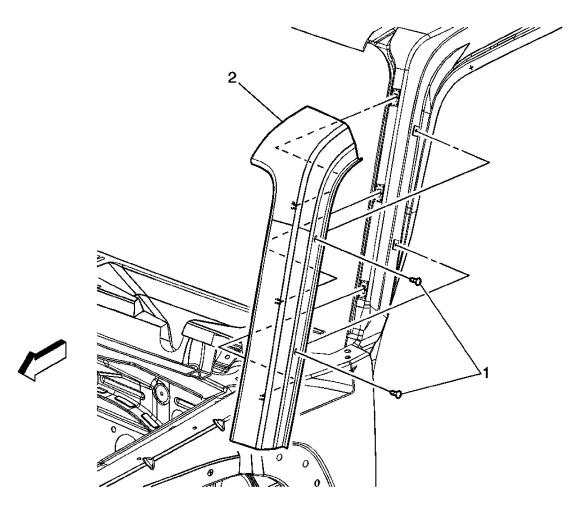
Windshield Pillar Reveal Molding Replacement Courtesy of GENERAL MOTORS CORP.
